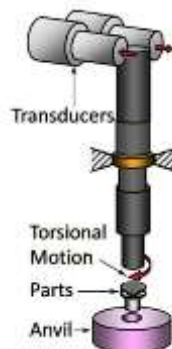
Ultrasonic torsion welder [14]
